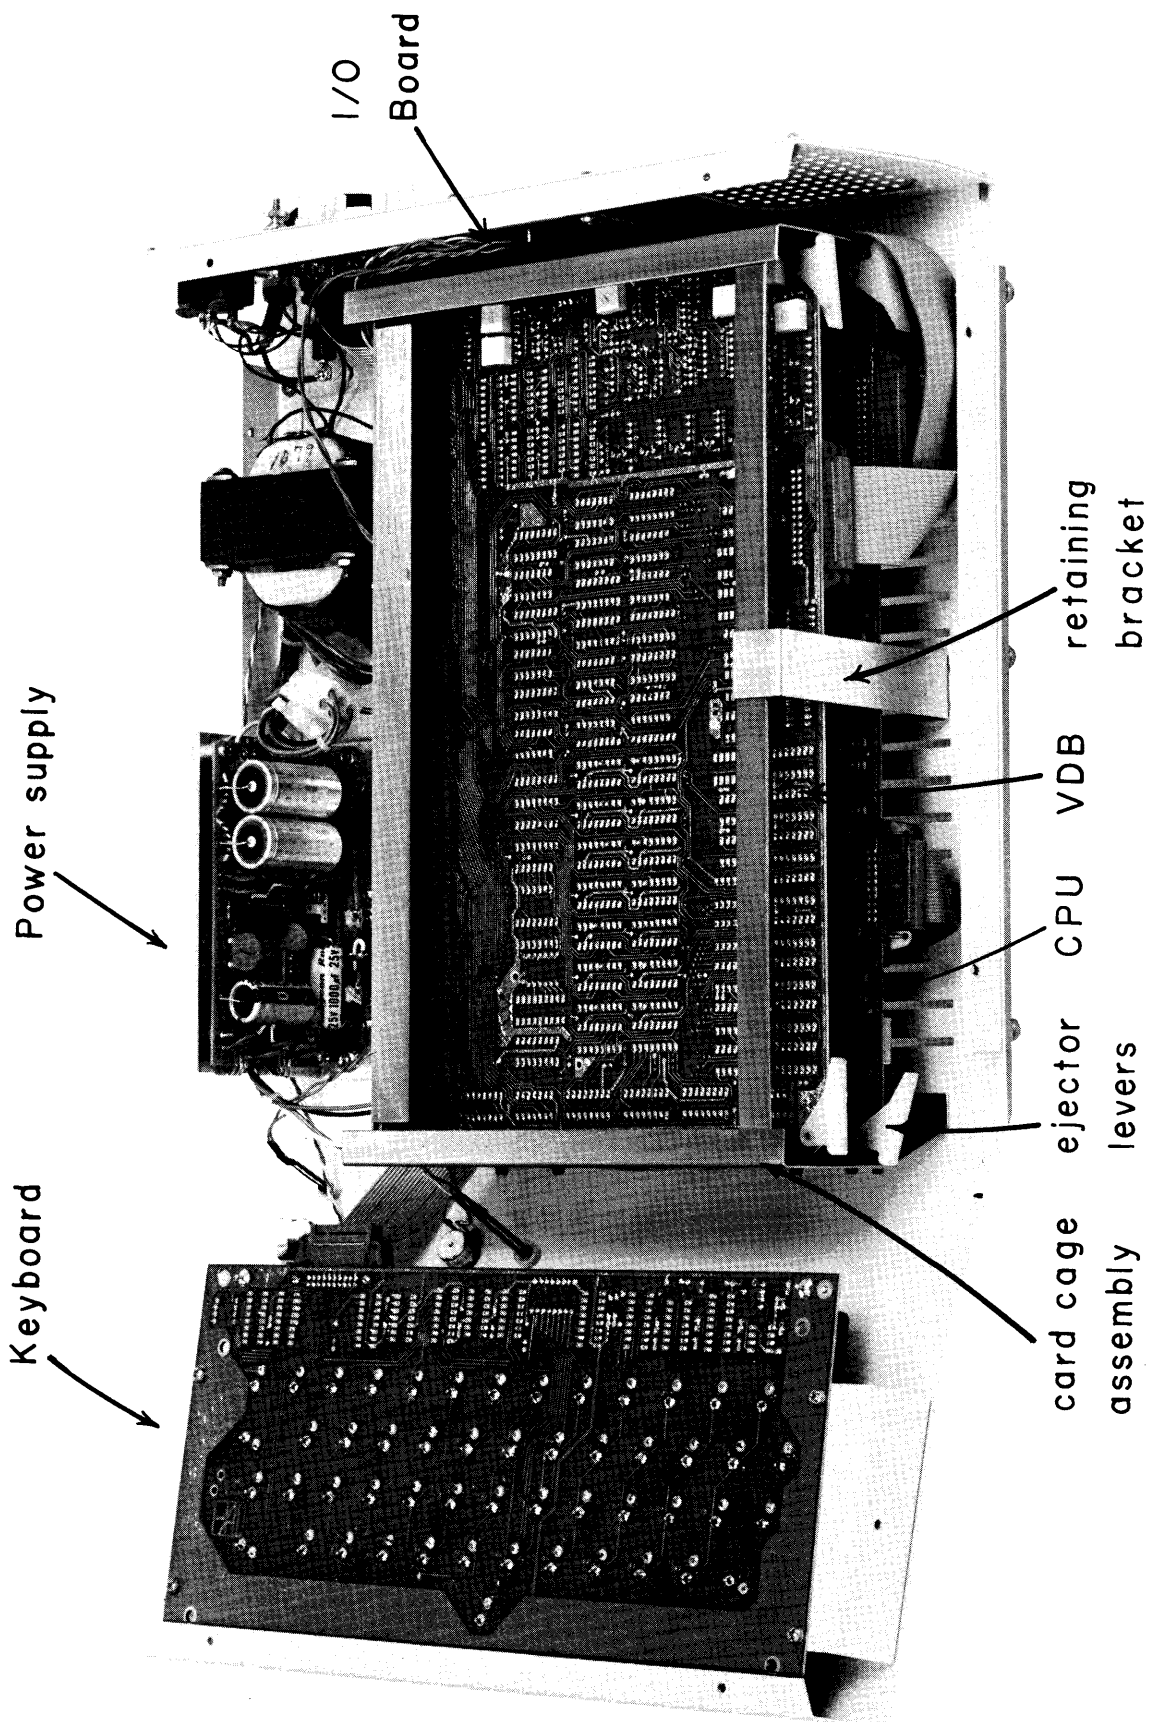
ASR INTERIOR -- IDENTIFICATION OF SUBASSEMBLIES
